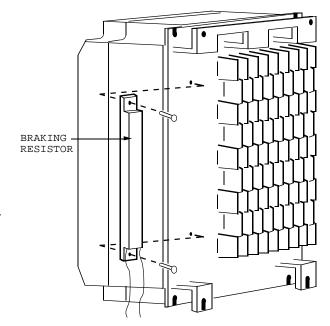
Mounting Braking Resistor on Heat Slnk
